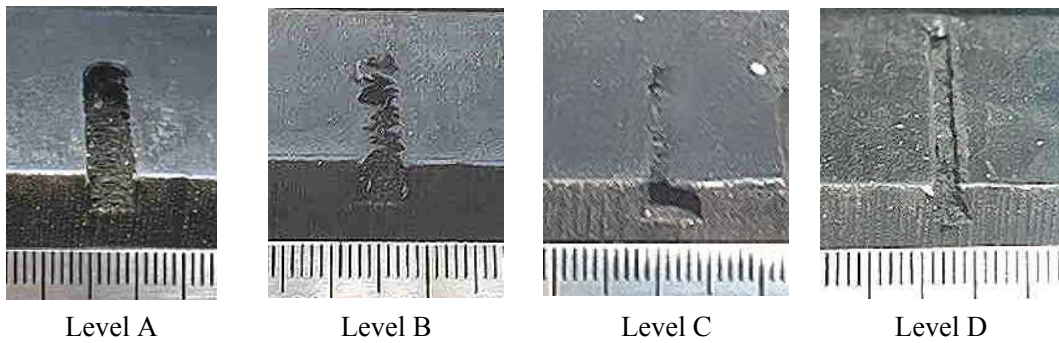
Examples of milled groove condition levels for an elastomer workpiece. (Level A: Clear groove; level B: Clear groove with residual burrs on the surface; Level C: Thin layer of elastomer on surface covering clear groove; Level D: Clogged groove)
